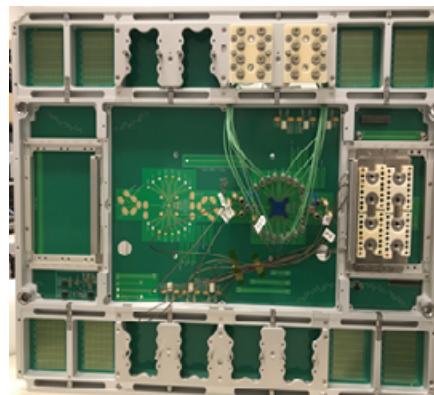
Bottom side of a mmWave Advantest V93000 ATE test fixture for socket testing of a 5G mmWave device.
